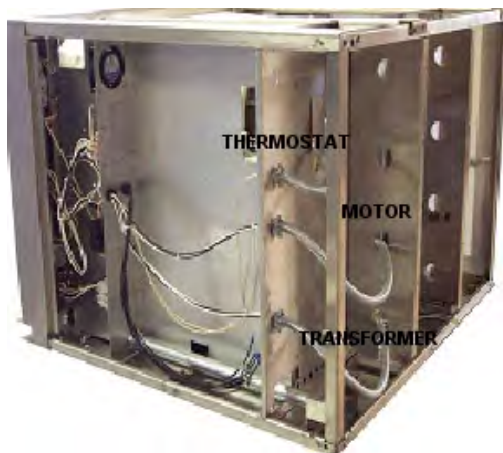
RACEWAY & FLEXIBLE CONDUIT
